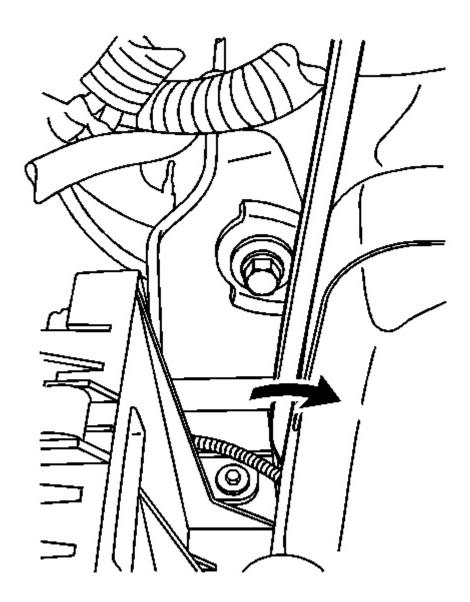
Accessing Forward Facing Bolt Courtesy of GENERAL MOTORS CORP.
